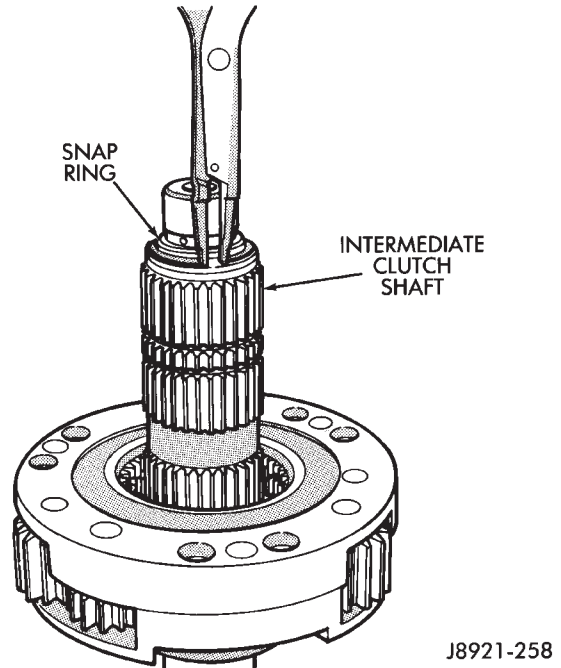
Intermediate Clutch Shaft Snap Ring Removal
